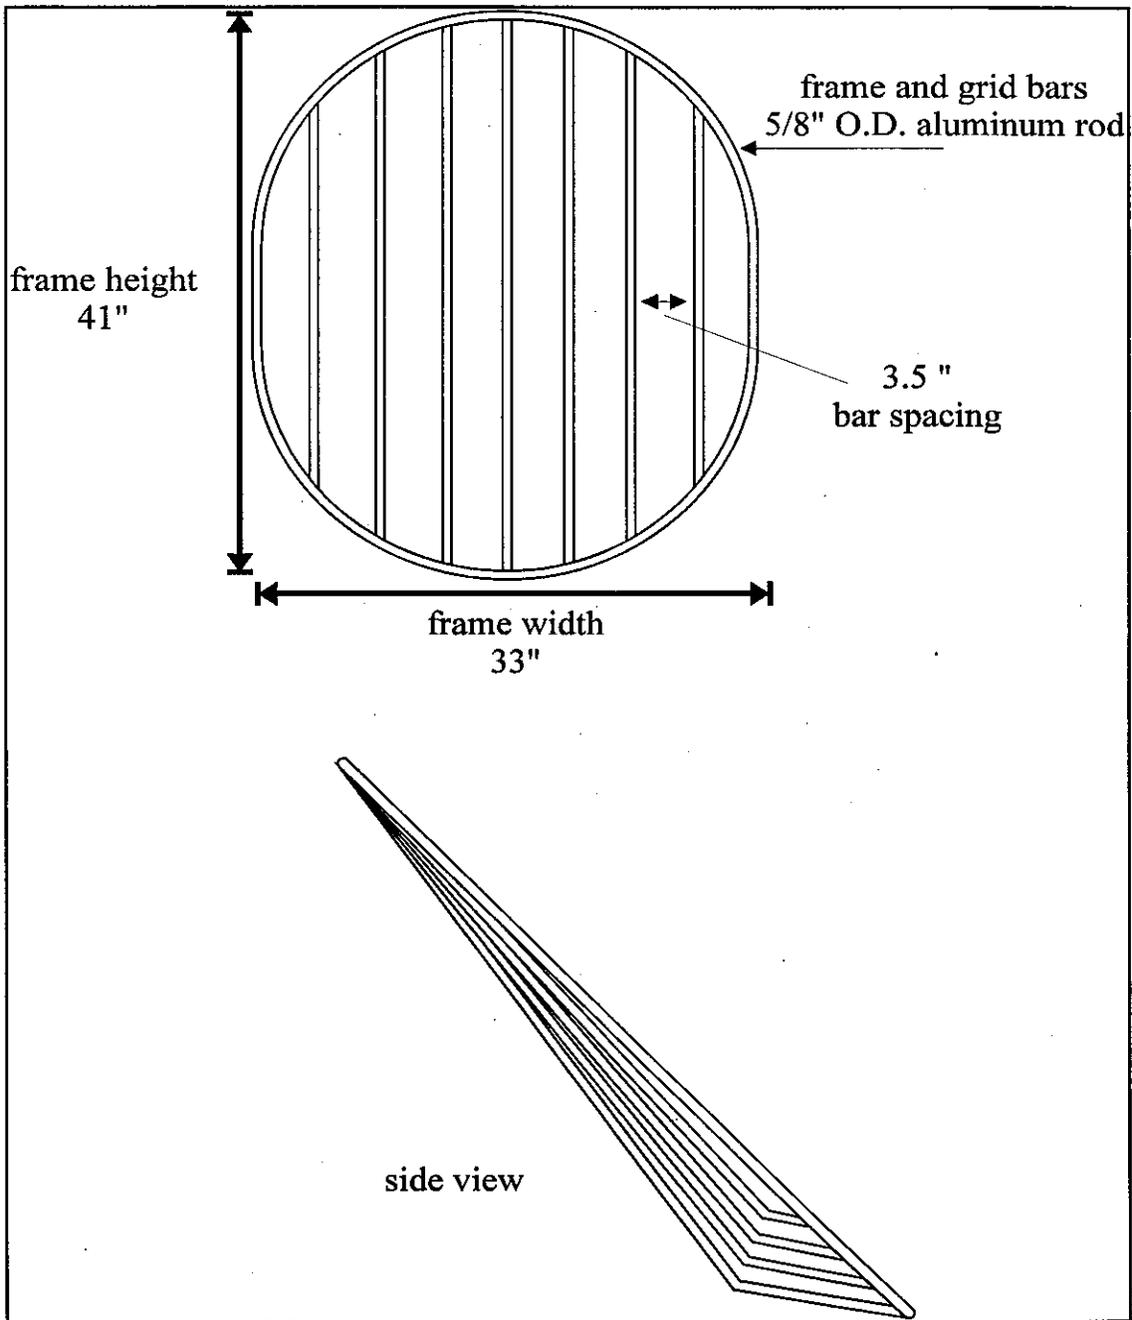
Dimensions of mid-size Super Shooter frame used in 1995 TED Tests
